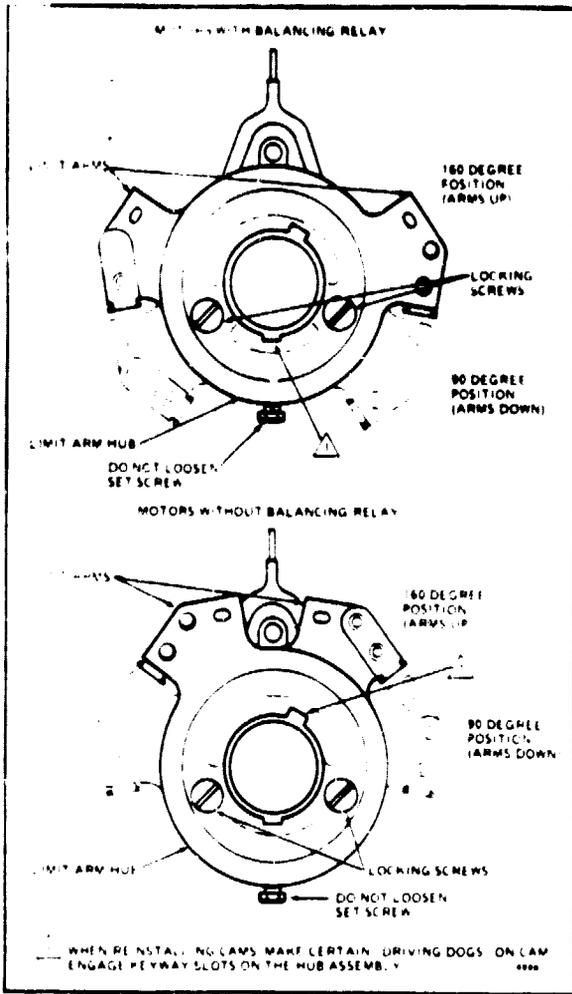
CHANGE THE POSITIONS OF THE LIMIT ARMS TO ADJUST THE MOTOR STROKE.
